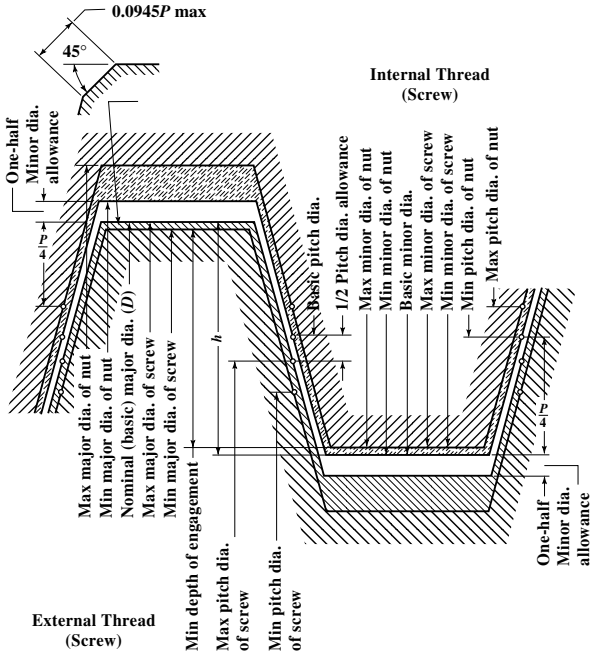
Disposition of Allowances, Tolerances, and Crest Clearances for General Purpose Single-start Acme Threads (All Classes)
